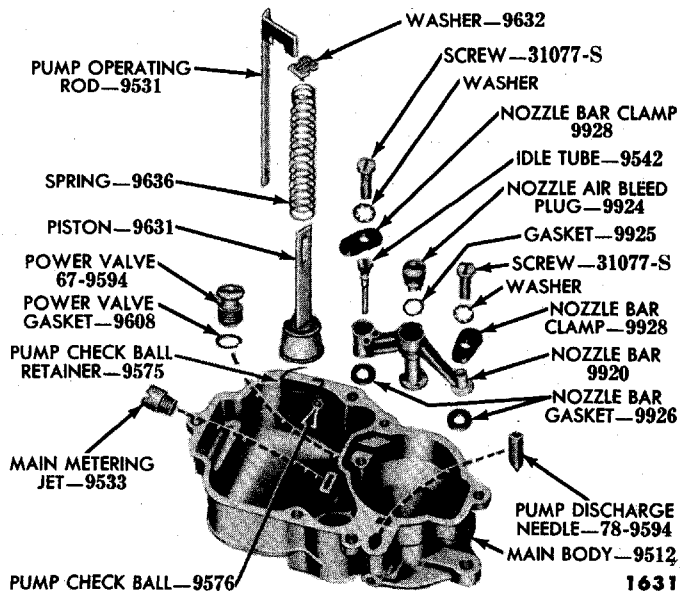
6-Cylinder Carburetor Main Body, Disassembled
